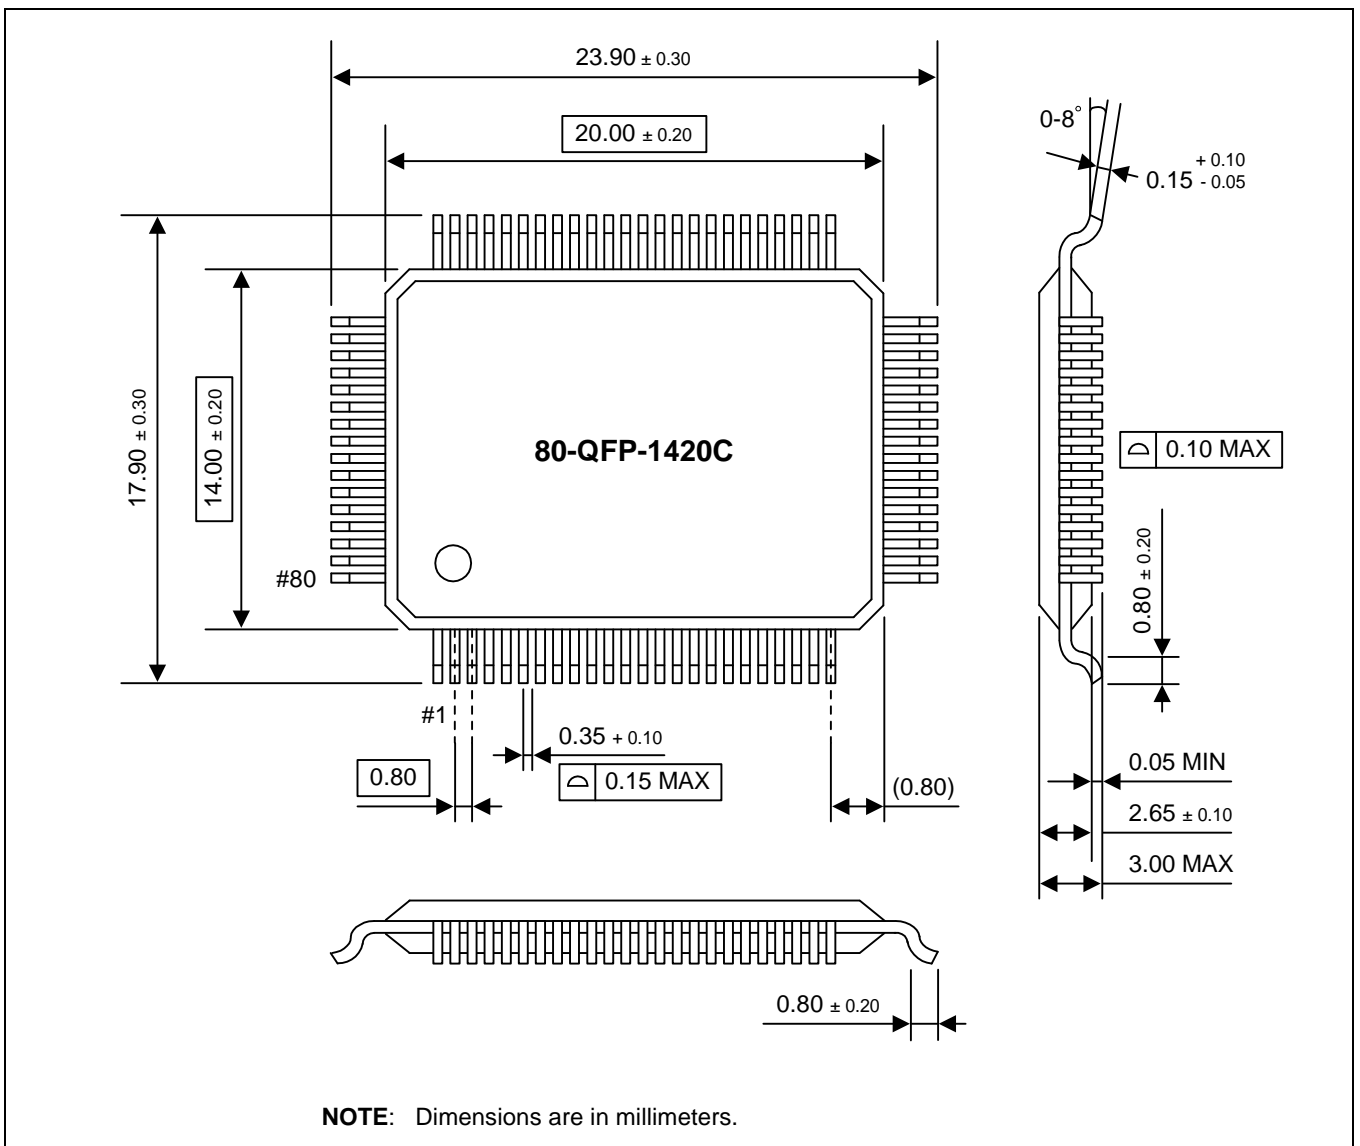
80-Pin QFP 1420C Package Dimensions
